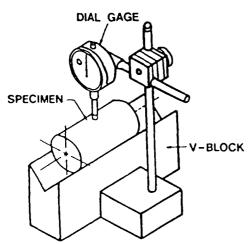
Assembly for Determining the Straightness of the Cylindrical Surface
